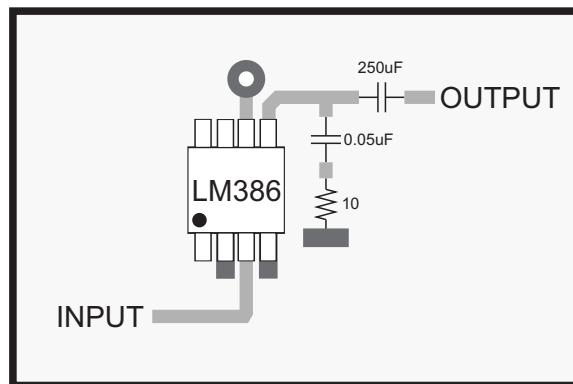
Layout Example for Minimum Parts Gain = 20 dB on SOIC package
